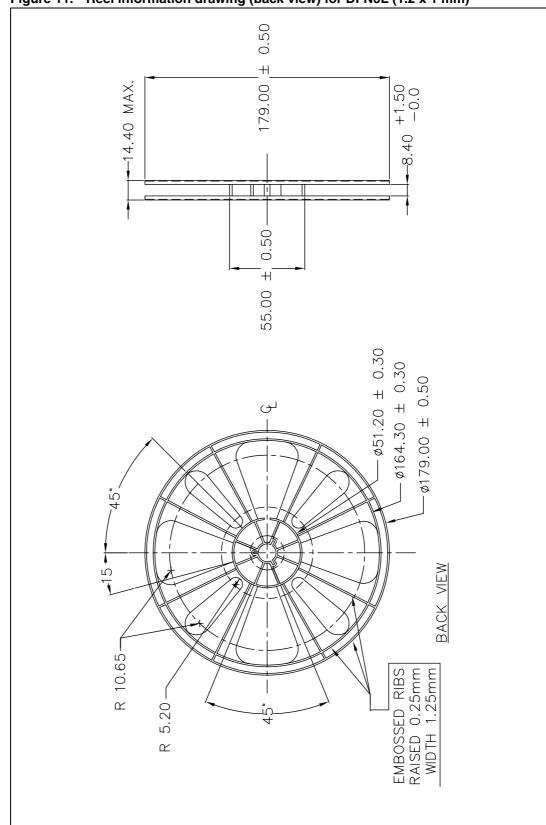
Reel information drawing (back view) for DFN6L (1.2 x 1 mm)
